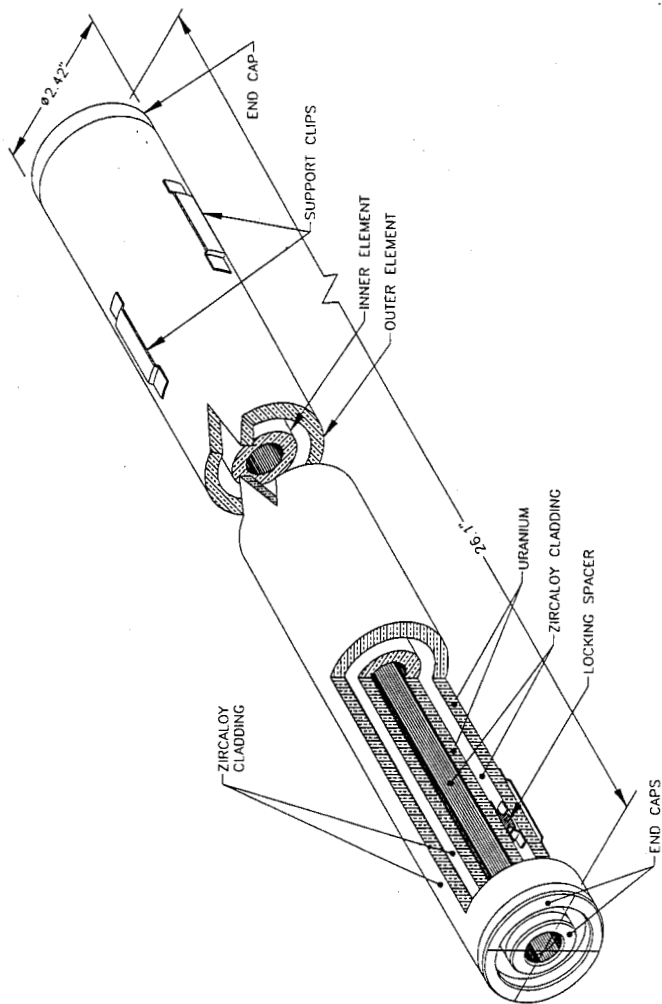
Isometric View of Mark IV Fuel Assembly.
